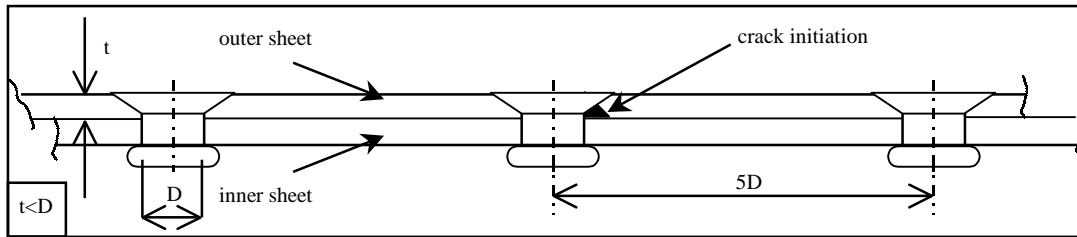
Typical aluminium joint with crack initiation in upper sheet, mating surface
